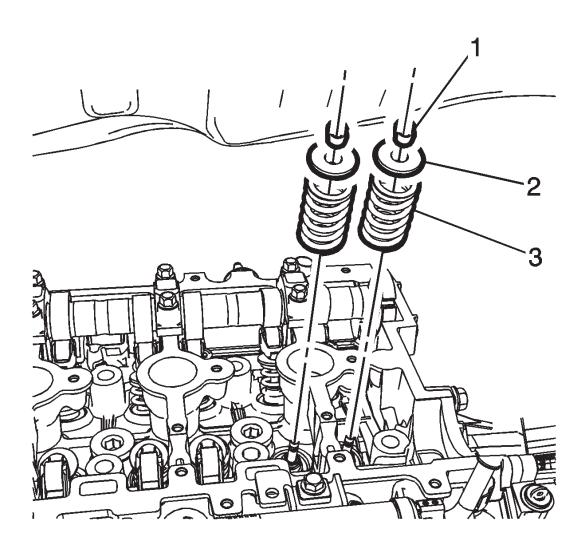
Valve Spring, Keepers And Retainer Courtesy of GENERAL MOTORS COMPANY
